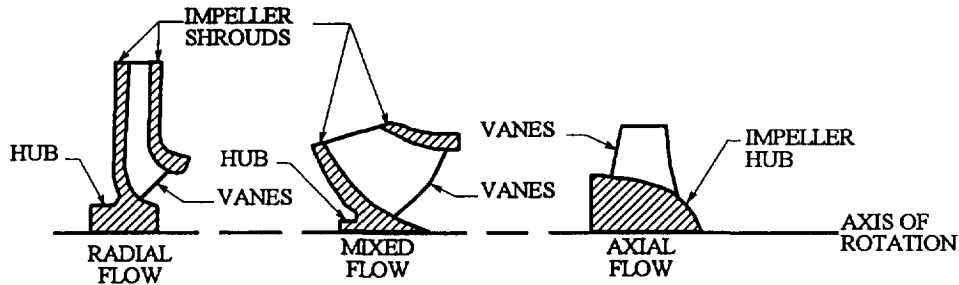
Hydraulic Geometry of Centrifugal Pump Impellers.
